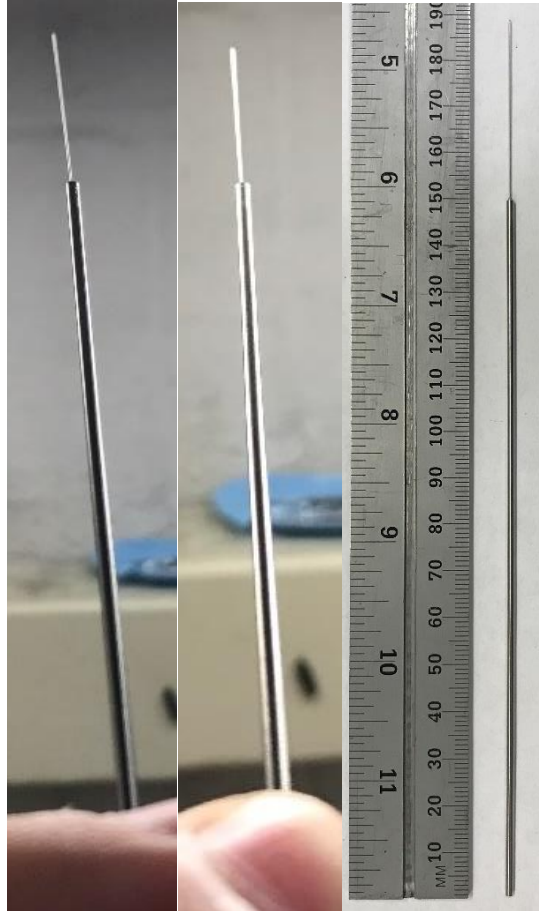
Assembled needles being straightened and final product ~19 cm long.
